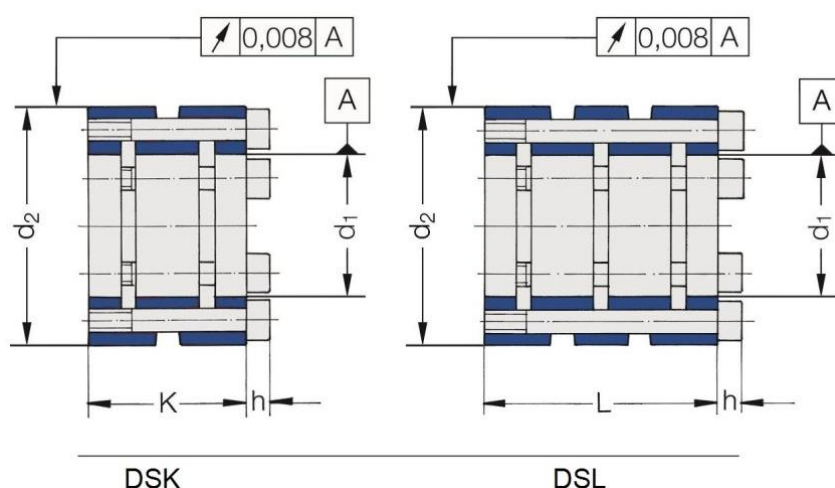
Sectional view of Spieth DSK/DSL clamping sets
